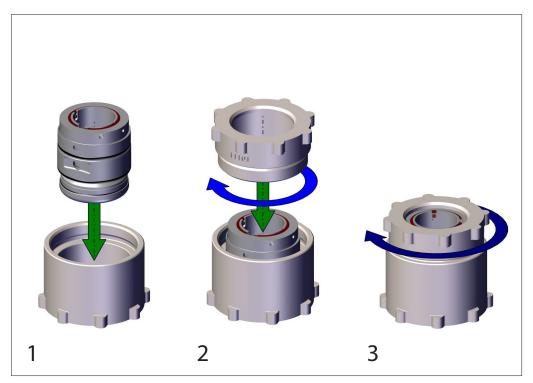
Using the assembly aid to dismantle a mechanical seal cartridge
